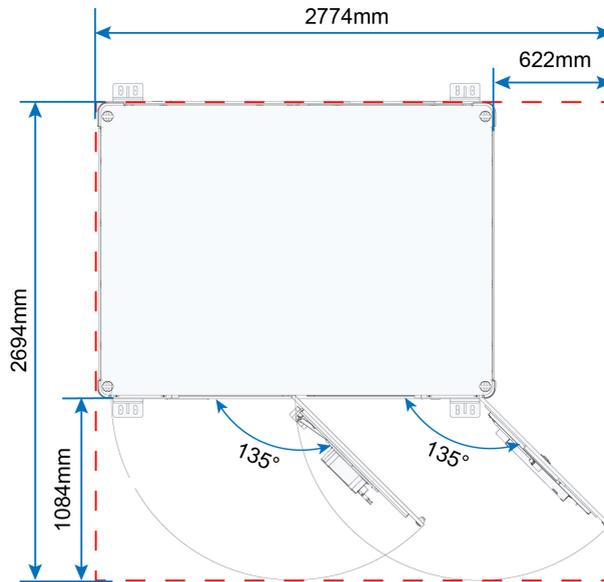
Dimensions of ESS with Its Door Fully Opened
